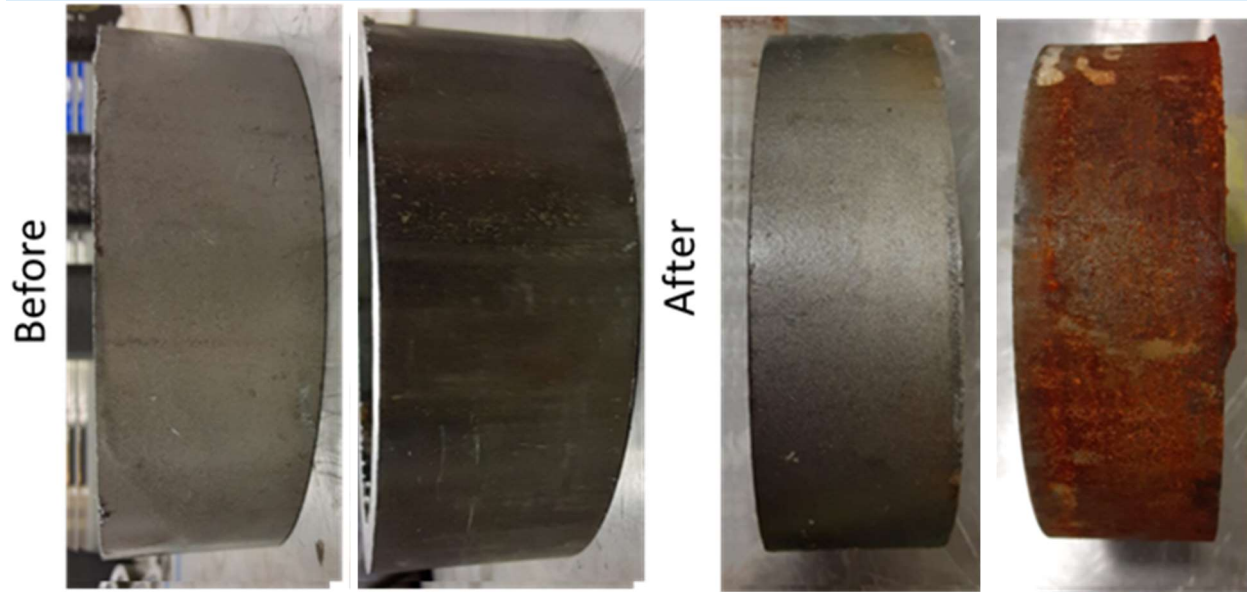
Lab Corrosion Testing of LSI-SS Coating and Bare Tube – (a) before ; (b) after 5% KCL 30C/7 day exposure.
